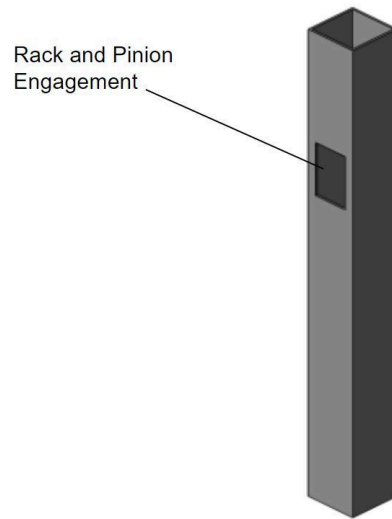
Picture of the shaft housing. The slot for the rack and pinion engagement can be seen on the left side of the housing.
